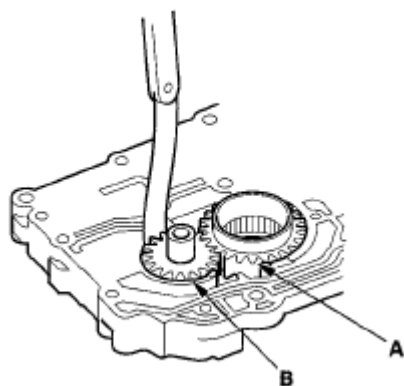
Measuring Side Clearance Of ATF Pump Drive Gear And ATF Pump Driven Gear
